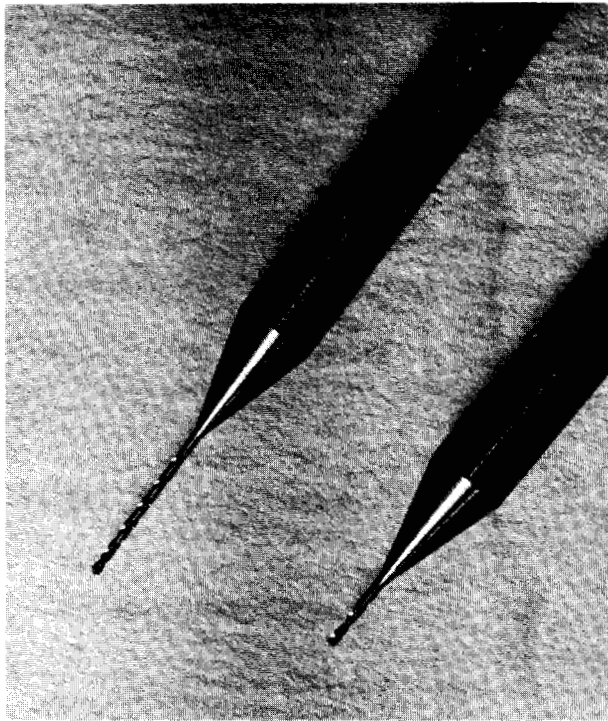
Sample drill bits for drilling 0.4-mm-diameter holes. The center drill (short flute) has a 0.381-mm diameter and is used to start the hole. The through-hole drill (longer flute) has a 0.406-mm diameter and is used to complete the drilling process.
